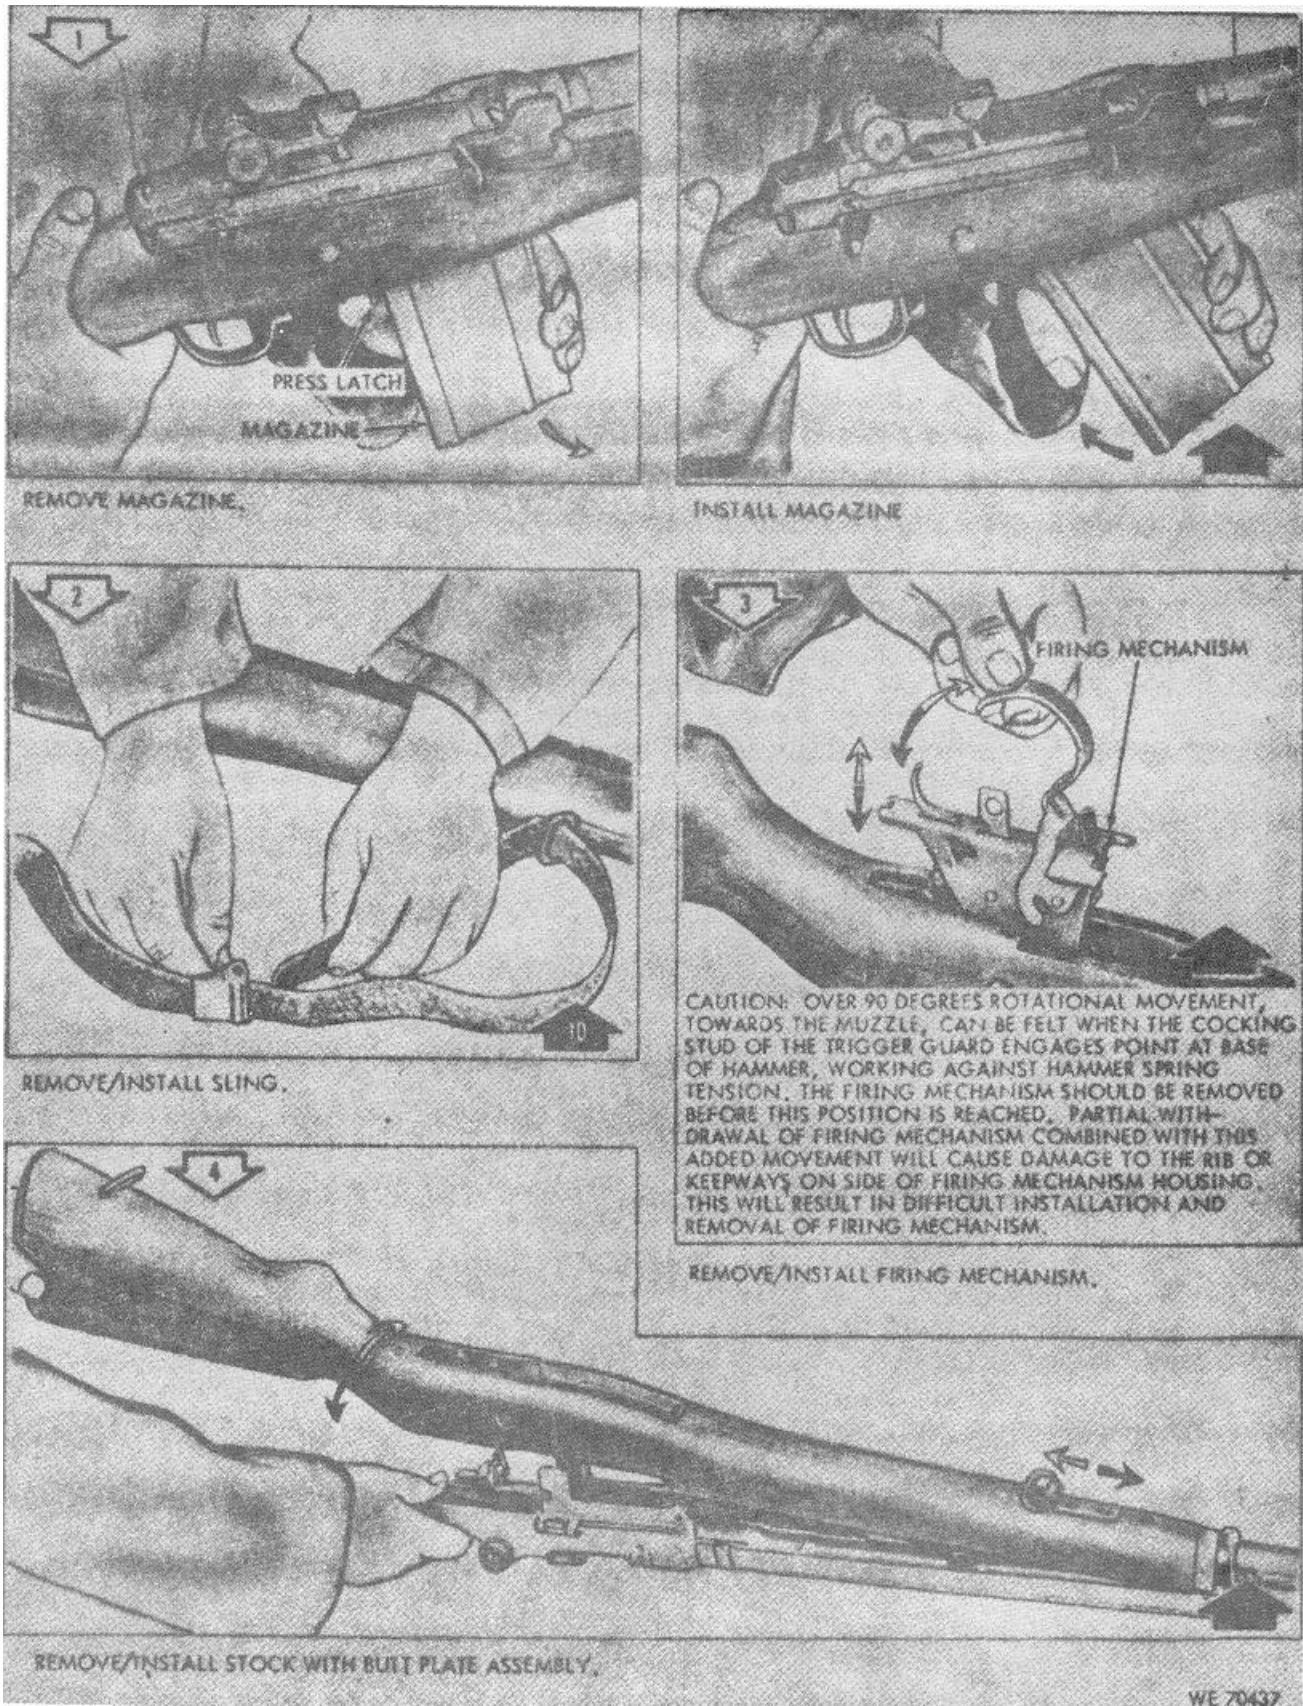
Disassembly/assembly of rifle components-partial exploded view.
